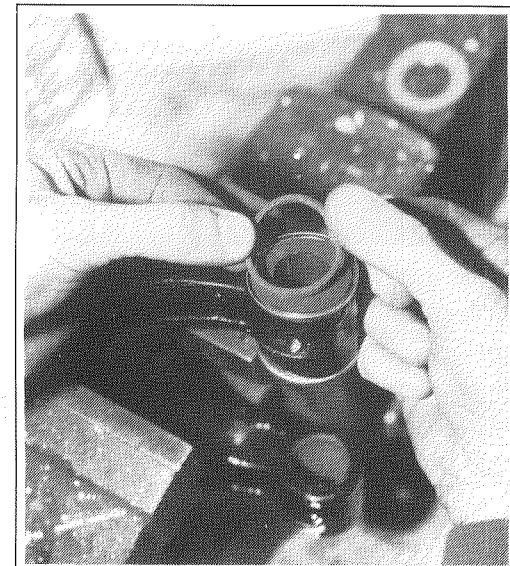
The rubber sealing washers fit over the edge of the nylon bushes.
